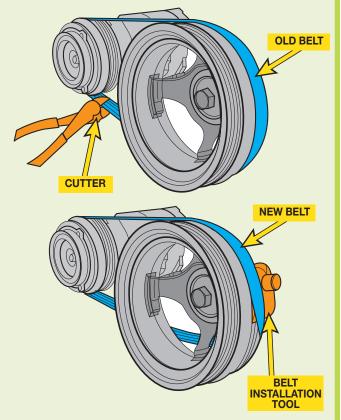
The old stretch belt is removed by cutting it and the new one installed using a belt installation tool.
